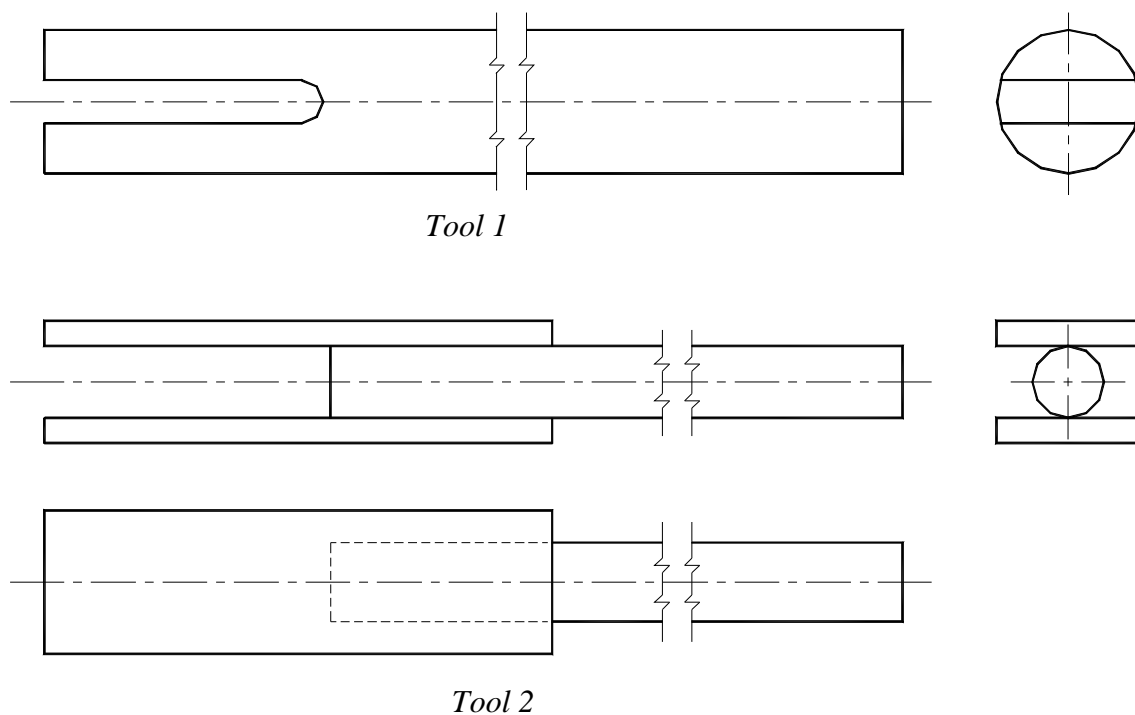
Tools used for straightening the damaged side plate of the fuel element
